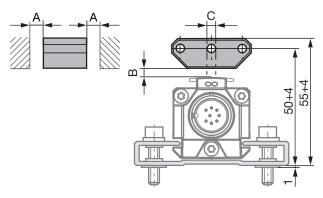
Dimensions and distances with BTL5-P-3800-2 magnet
